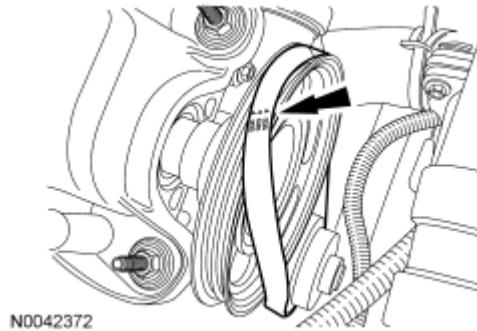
Locating Coolant Pump Belt On Coolant Pump Pulley
